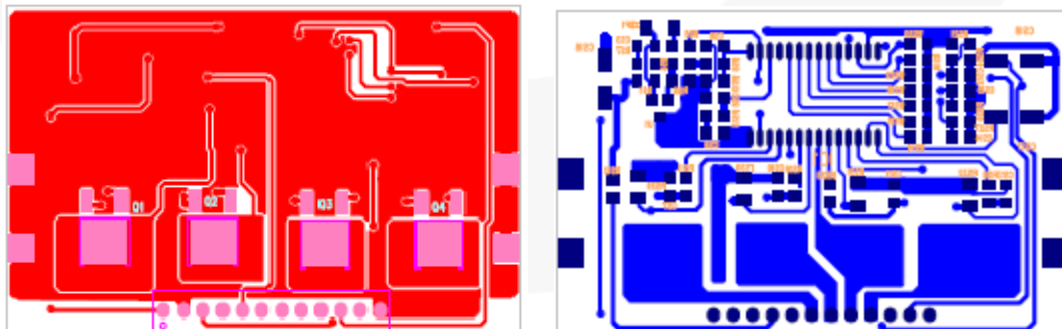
Top / Bottom Sub Board (Current-Balancing Part) Pattern
